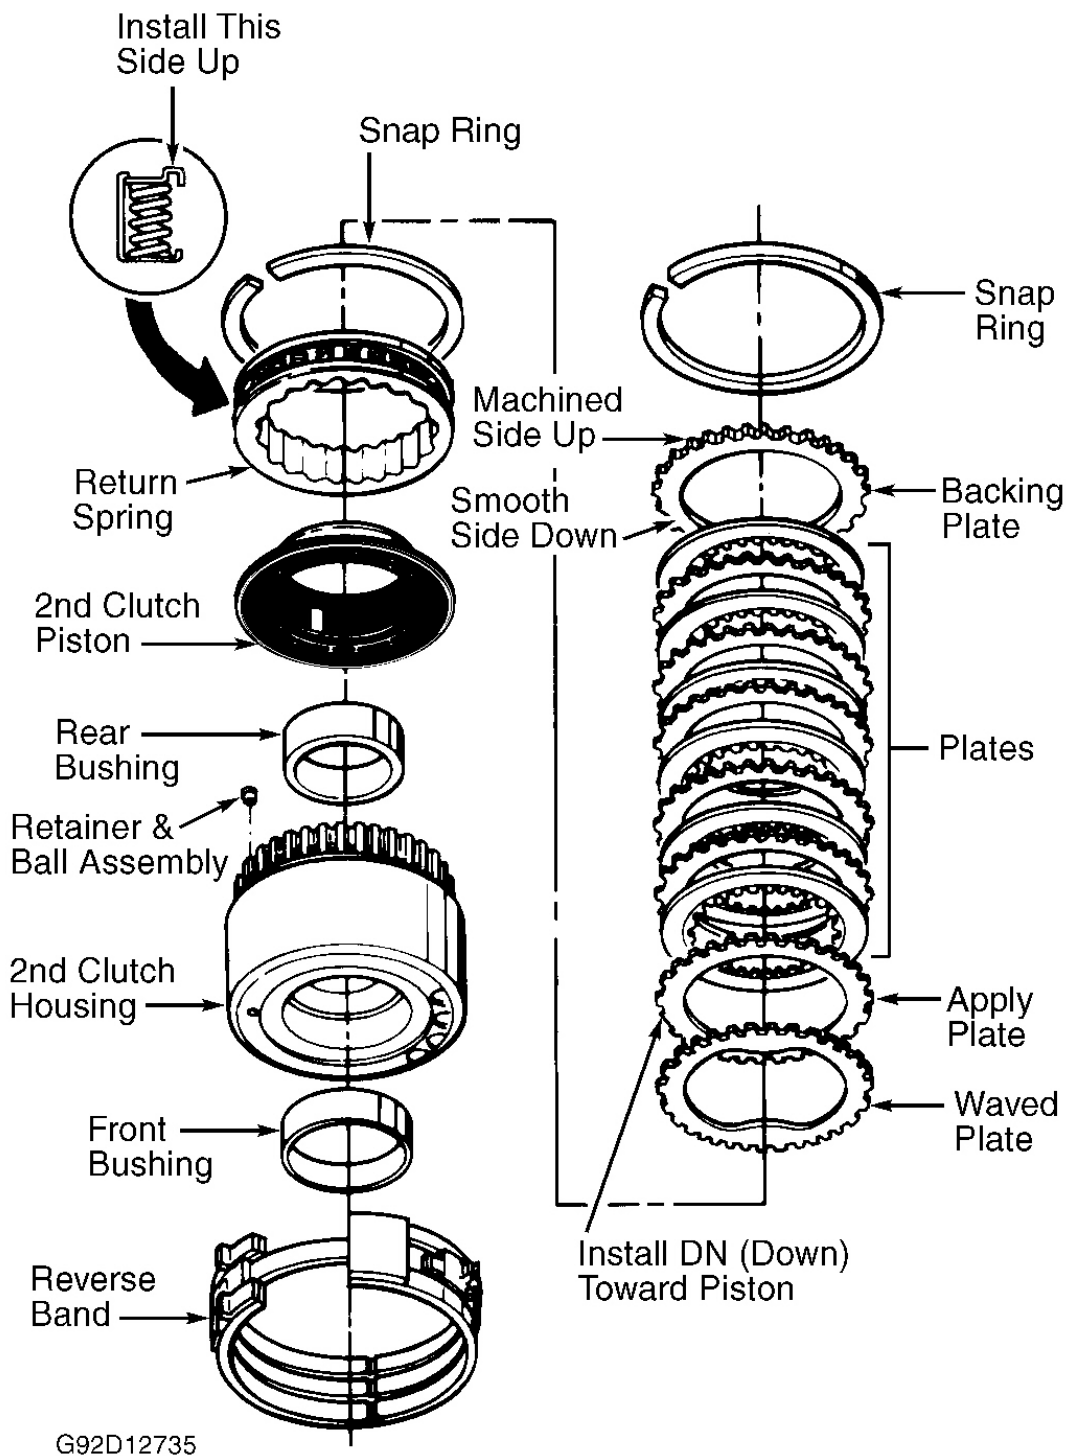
Exploded View of 2nd Clutch Housing & Reverse Band
